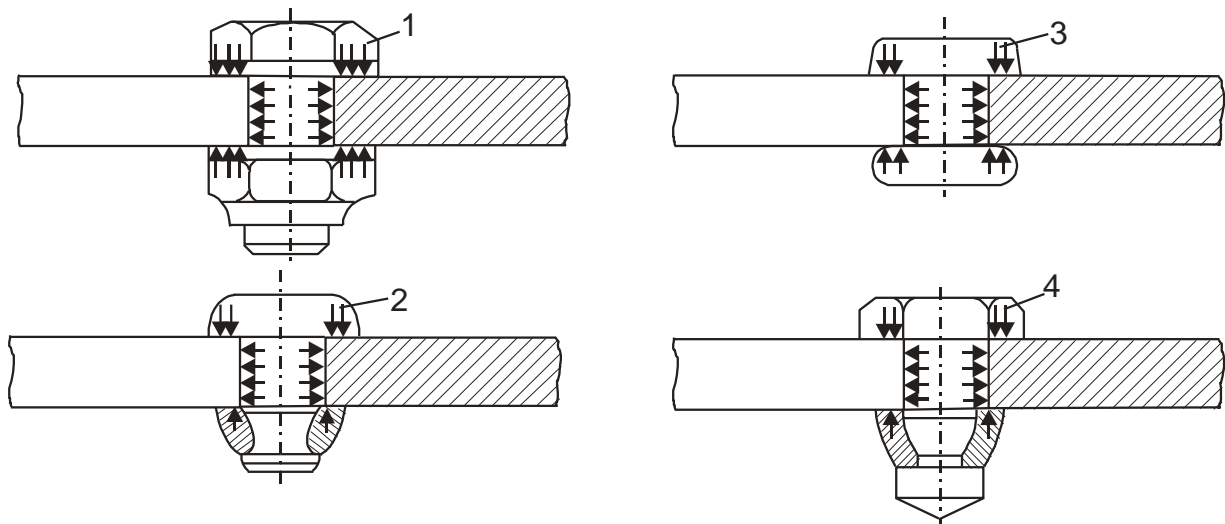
Fatigue cracks growth delay methods:
